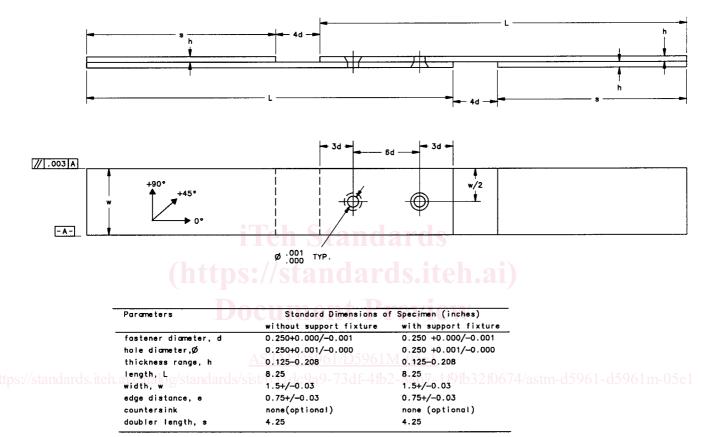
Single-Shear, Double Fastener Test Specimen Drawing (Inch-Pound)
